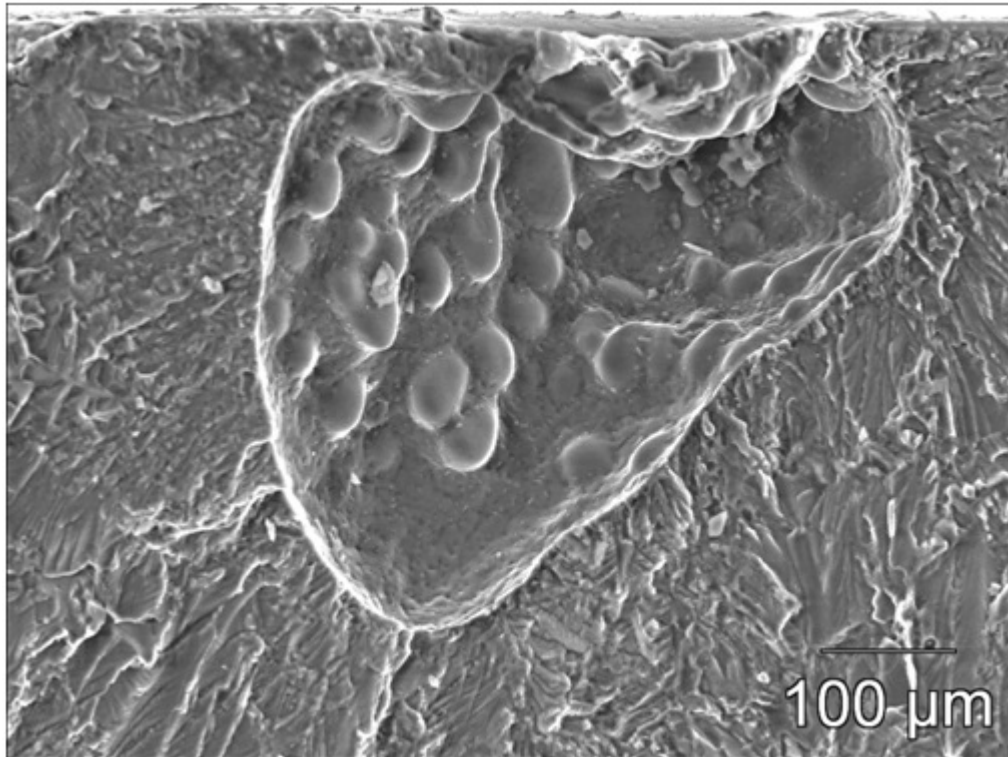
Fracture surface of as-cast 356-T7 fatigue specimen ($R=0$, maximum load 2424 N, cycles to failure 727,386, defect area 0.03 mm²).
